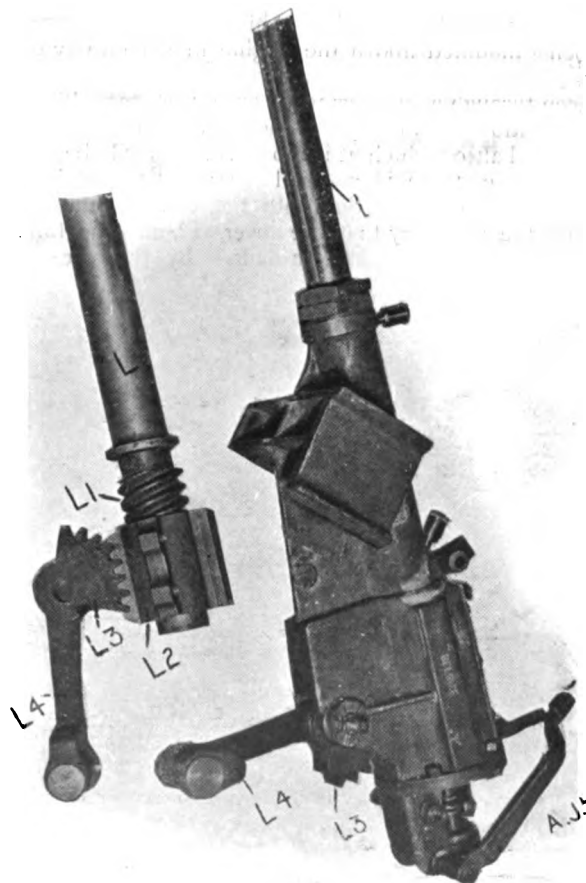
The Belsize Steering Gear. The view on the right shows the complete gear in its casing, while to the left is seen the combined feed screw and toothed-rack-mechanism separately.]
